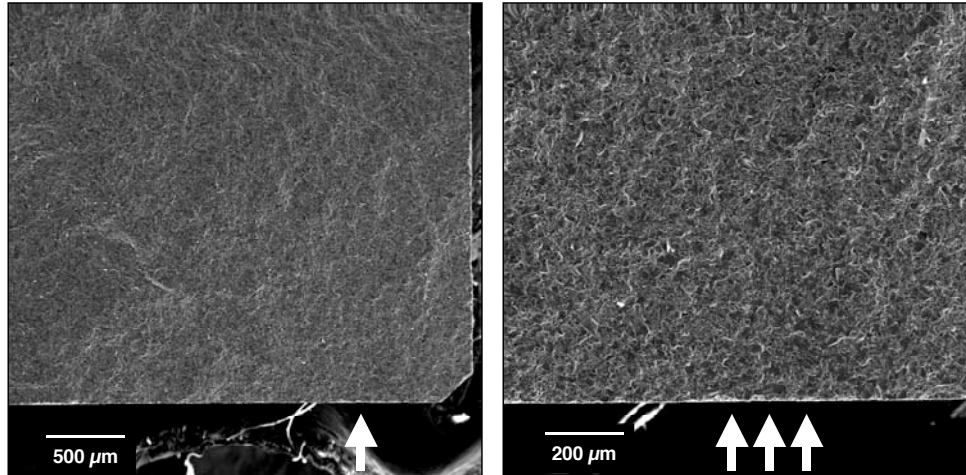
Fracture surface of a rotary-ground, chamfered, ASTM C1161B bend showing (left) failure location and (right) higher magnification image of the location containing the strength-limiting flaw.
